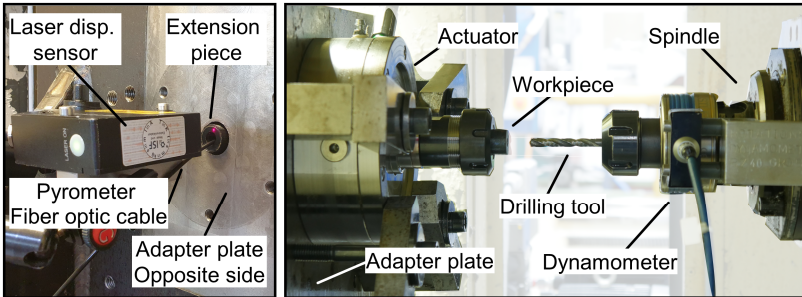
Vibration assisted drilling (VAD) setup in horizontal machining center
